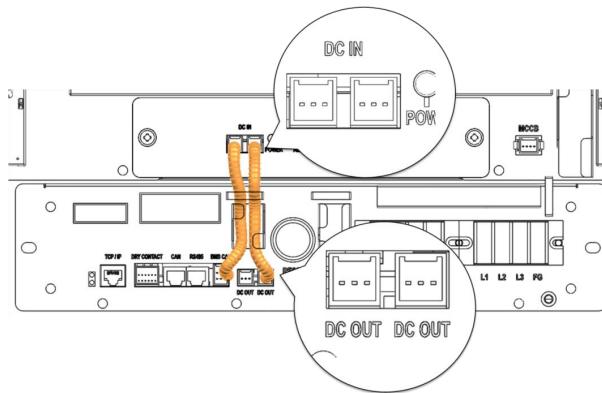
DC Power Cables from SMPS Assembly Type A to SMU
